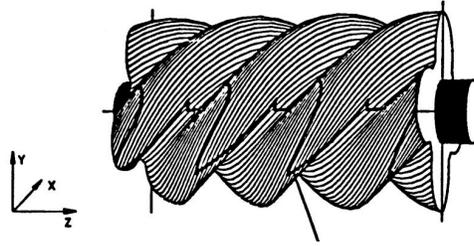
Seal line on a male rotor (Diagram by courtesy of S. Jonsson (1985))
